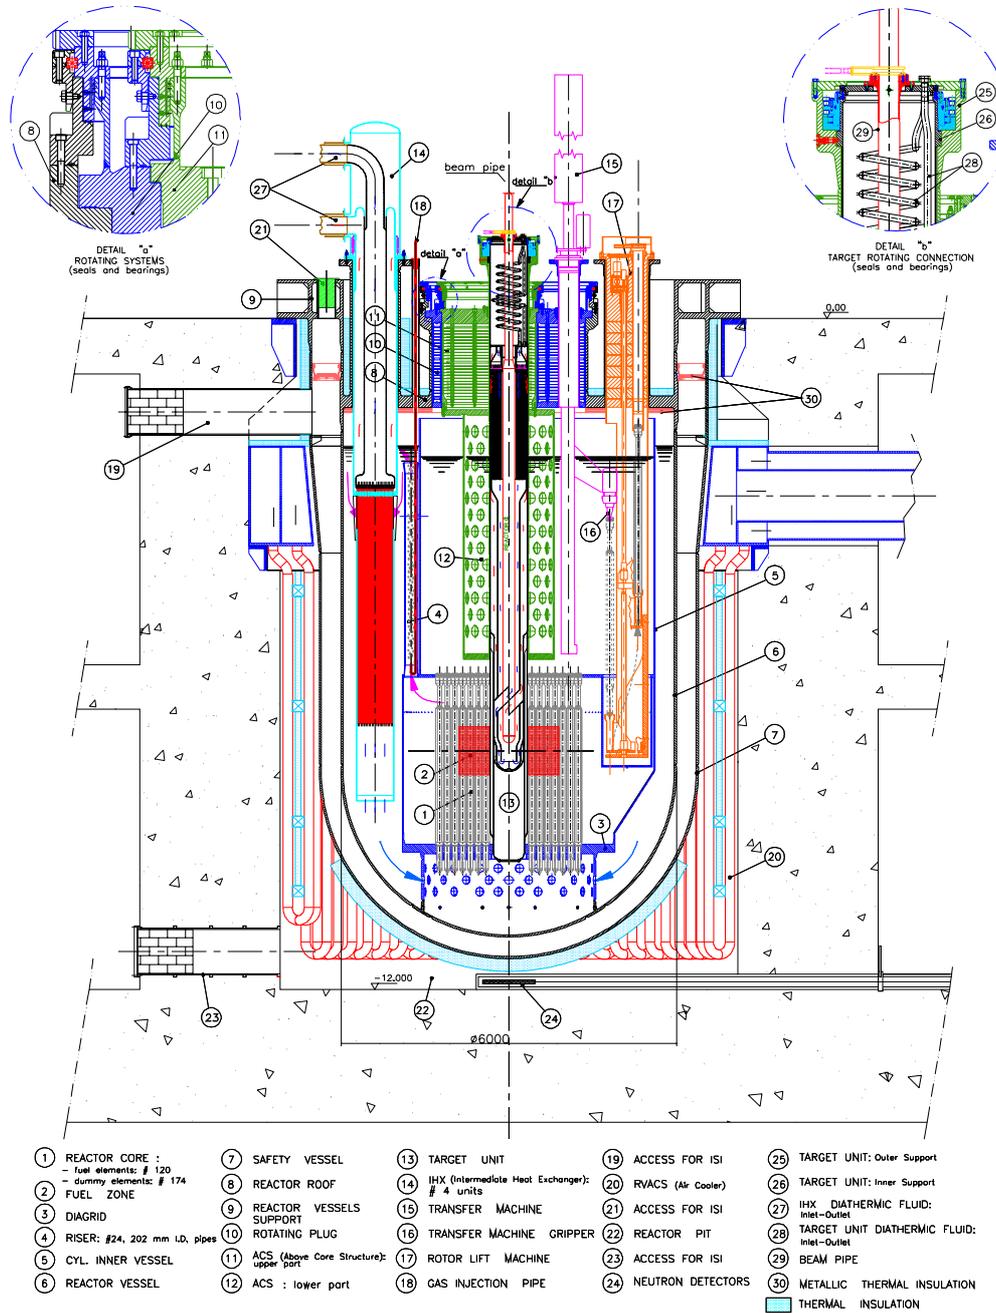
Experimental accelerator driven system assembly drawing of a 100 MW facility cooled by gas
